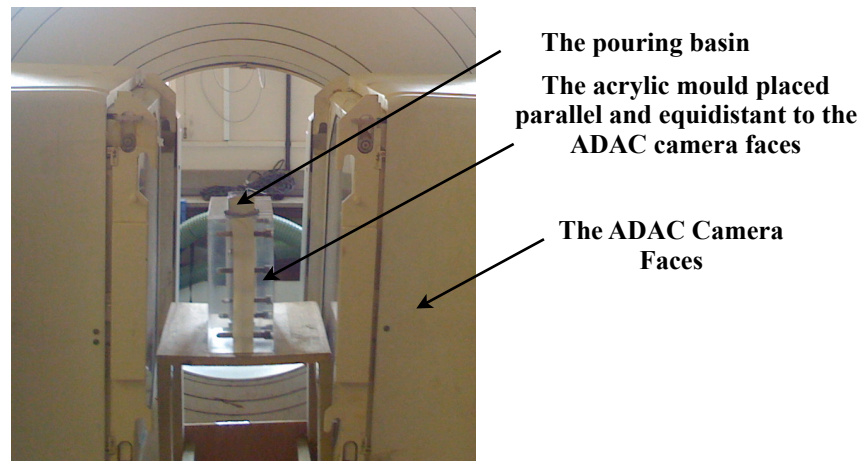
A photograph showing the setup of the Perspex™ mould in between the (ADAC) positron camera faces.
